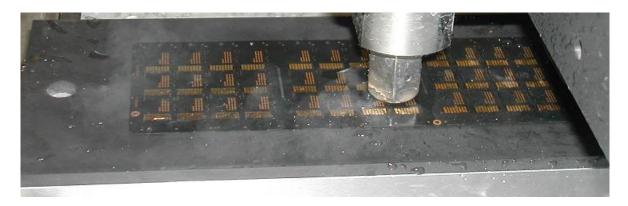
ASJ Is Singulating Micro SD Strip on Single Full Cutting Fixture
